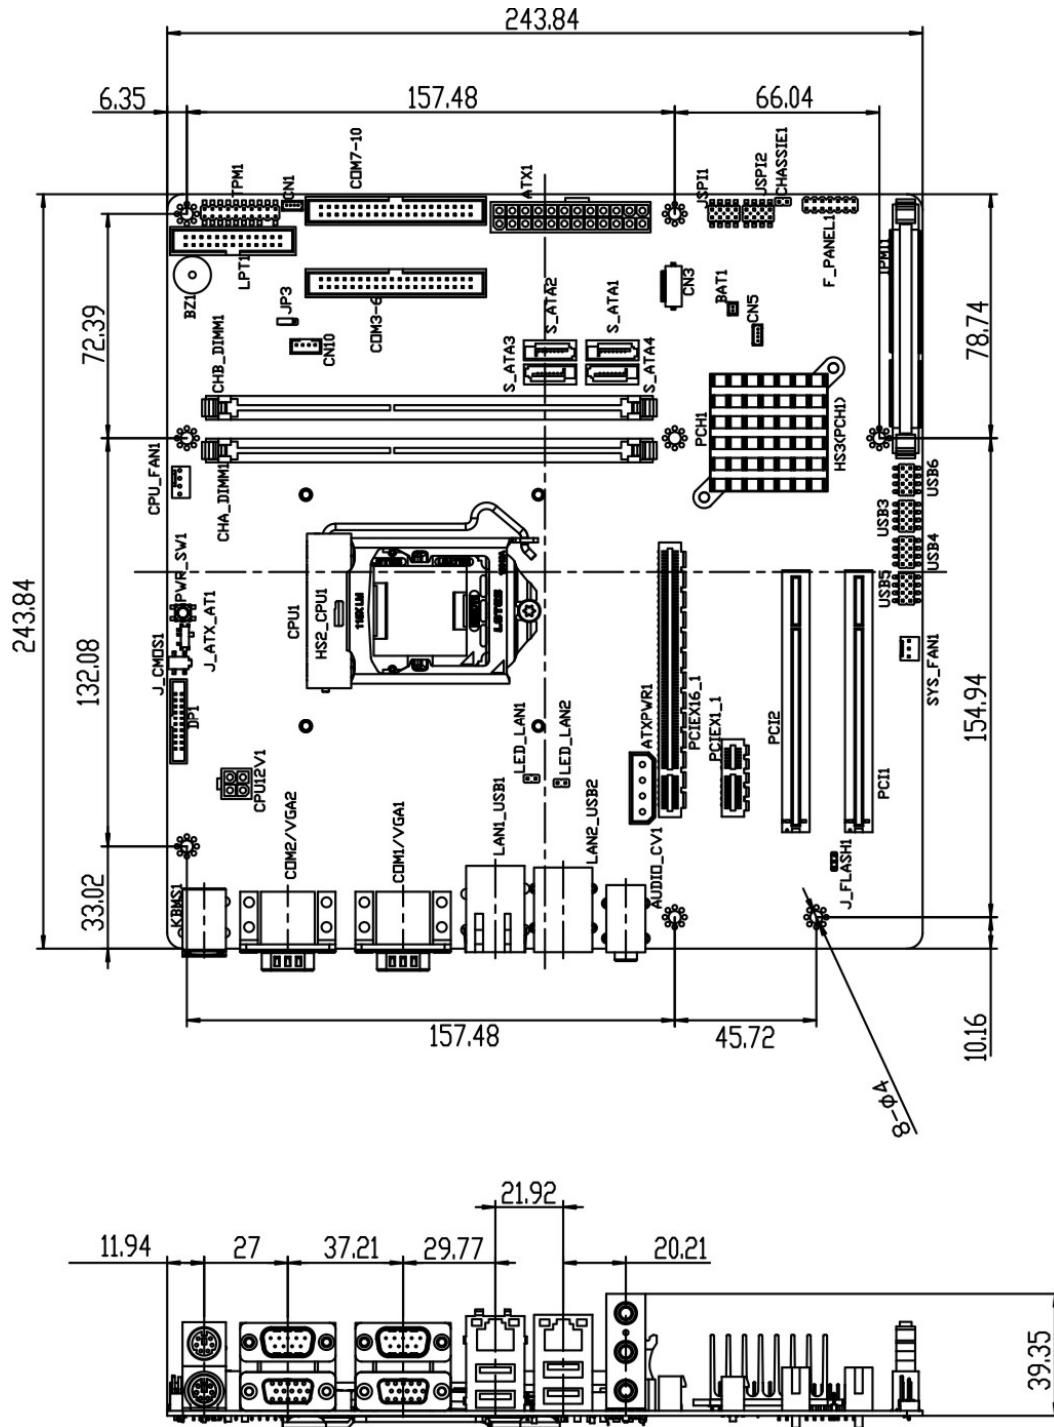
IMB-H810-i2 Dimensions (mm)
